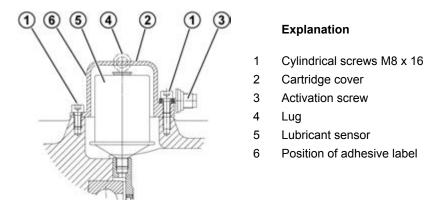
Replacing the automatic lubricant dispenser with standard motor mounting
